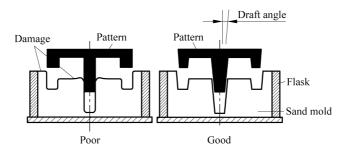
Taper on patterns for case of removal from the sand mold
